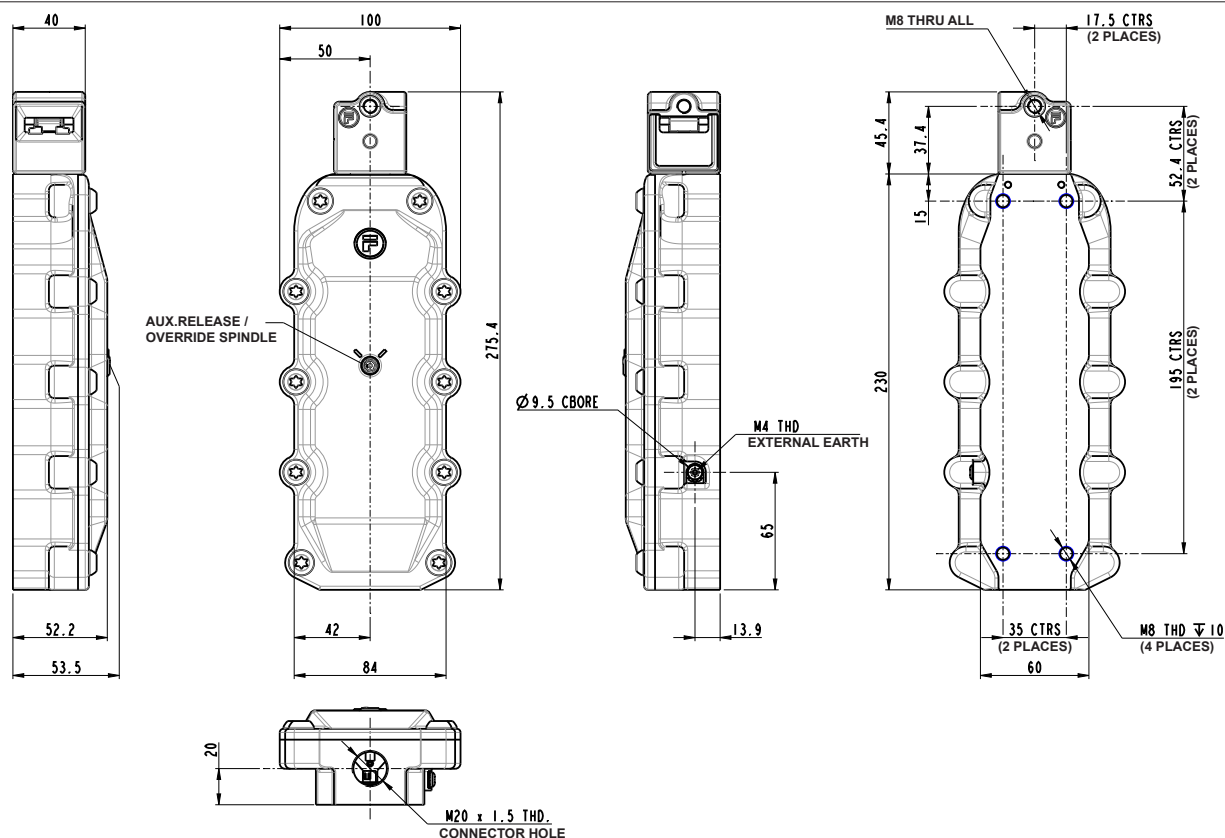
Dimensional Drawing – Alfred Solenoid Controlled Guard Lock with Key Adaptor(s)
